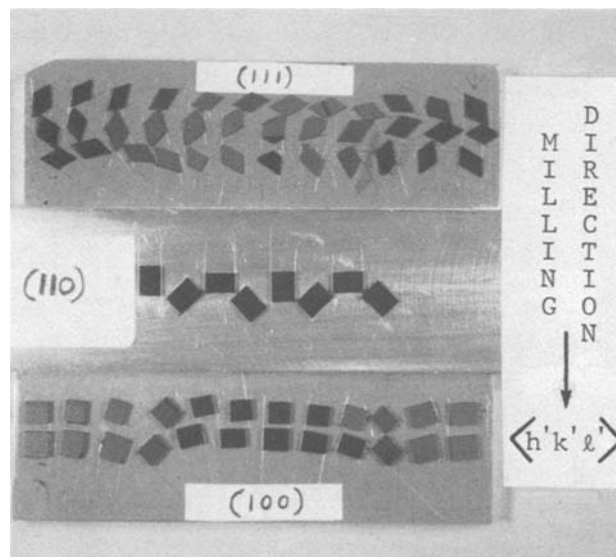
Demonstration of the effect of different milling directions. After breaking up 3 initial single surfaces into small pieces the pieces were reassembled for milling at consecutively increasing angles.
